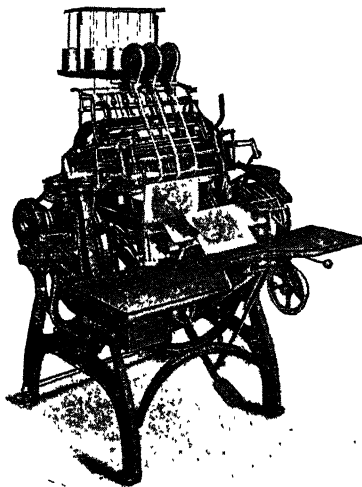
"BREHMER" NO. 38½ BOOK-SEWING MACHINE.
